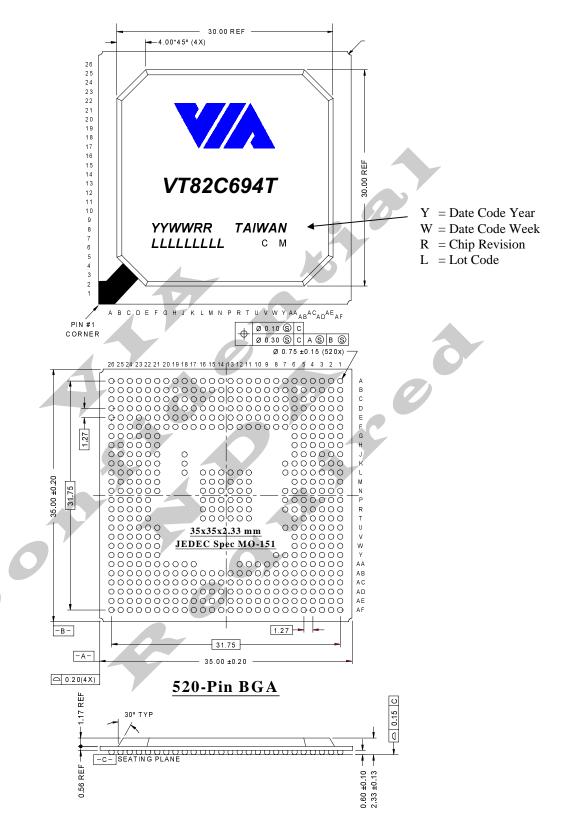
Mechanical Specifications - 520-Pin Ball Grid Array Package
